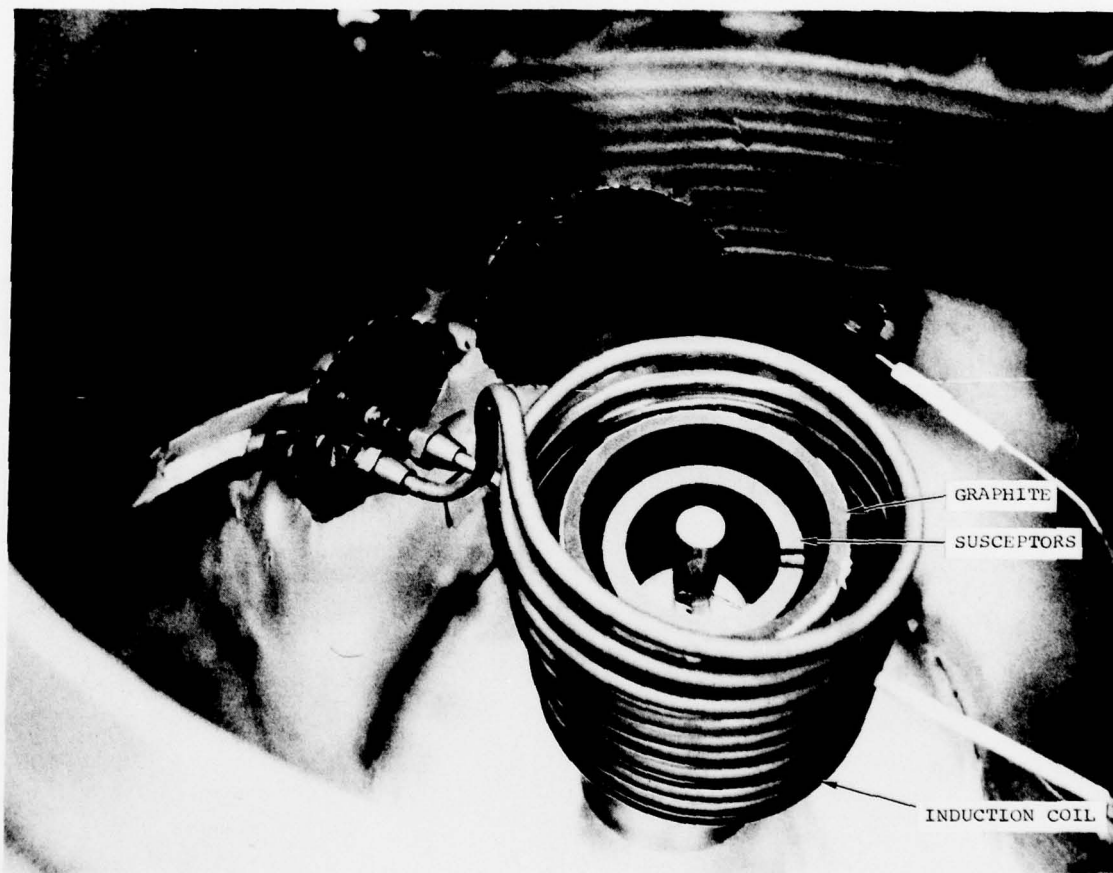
View Inside Chamber Showing Induction Coil and Susceptors. Top Tooling Removed.
